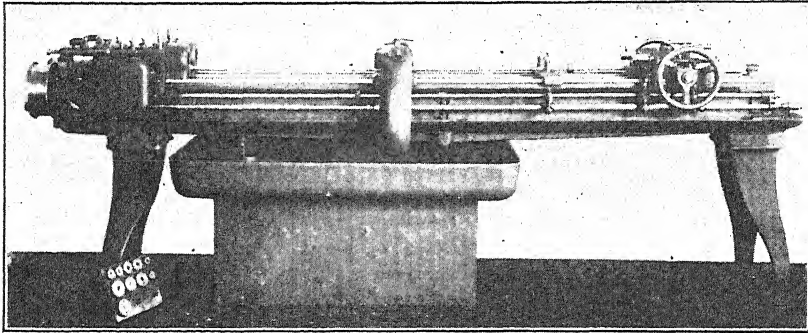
The Pratt and Whitney No. 1 Two-Spindle Deep-Hole Driller.
